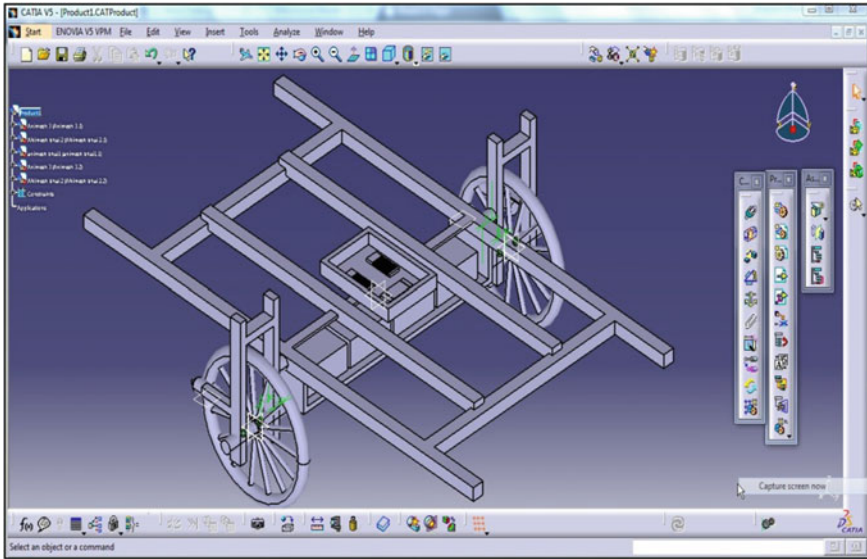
CAD model of the Lab-built two-wheeled mobile robot
